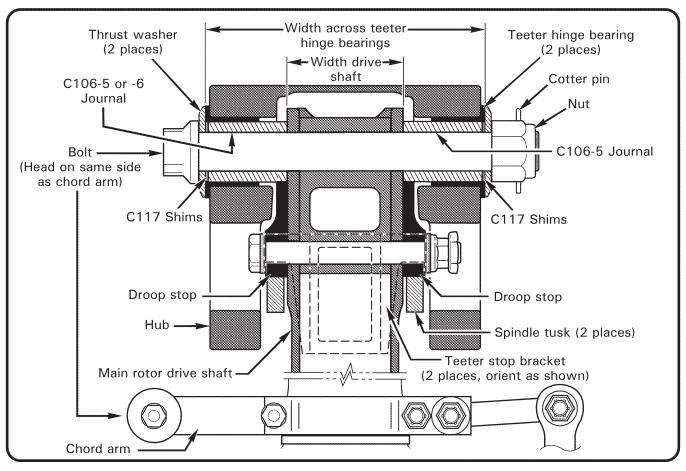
TEETER HINGE (HUB INSTALLATION)
